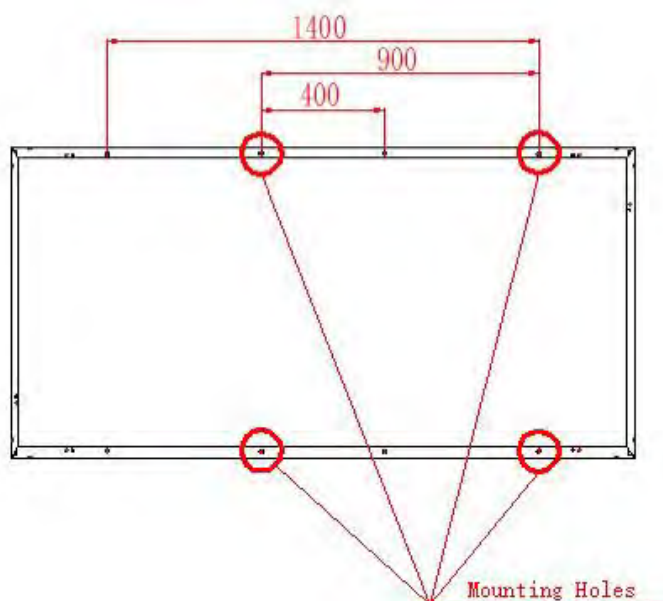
Backsheet-Glass module with Single-axis Tracing System
